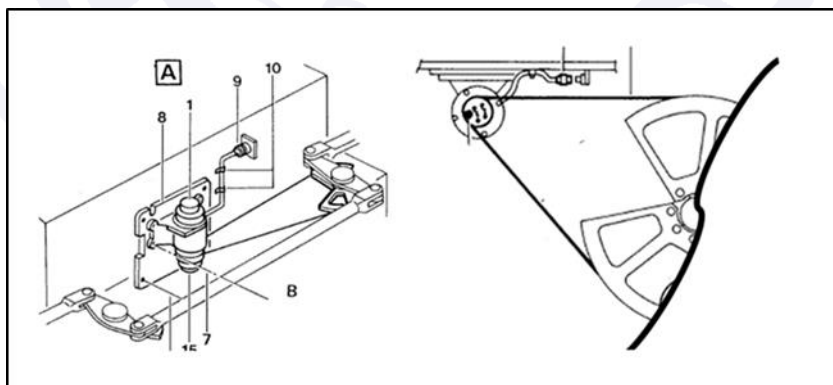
Servo Drive (item 1) connected to the bellcrank using PN S2211001100000 control cables.
